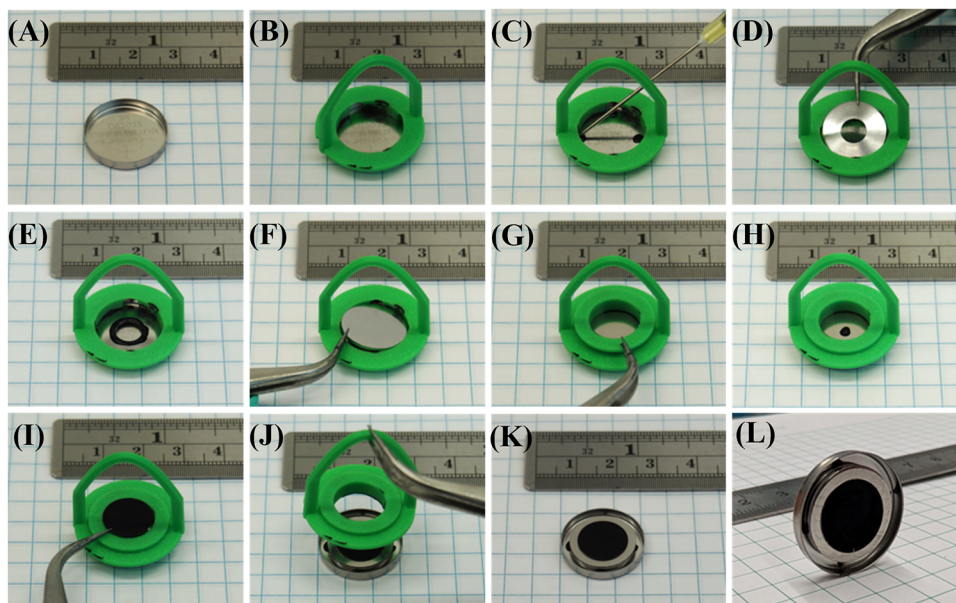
Demonstration of conductive adhesive-assisted assembly of a CR2032 coin cell using the two part alignment device depicting order of operations with (A) the cathode case, (B) alignment tool insertion, (C) application of conductive adhesive in the notches of the alignment device, (D) addition of spring, (E) application of conductive adhesive applied along the top small diameter washer spring surface, (F) addition of the spacer, (G) installation of the cathode aligner insert, (H) conductive adhesive applied to the spacer surface, (I) placement of the cathode, (J) removal of the alignment device followed by (K) brief rest allowing adhesive to set/dry yielding (L) the completed bottom assembly with alignment secured by conductive adhesive.
